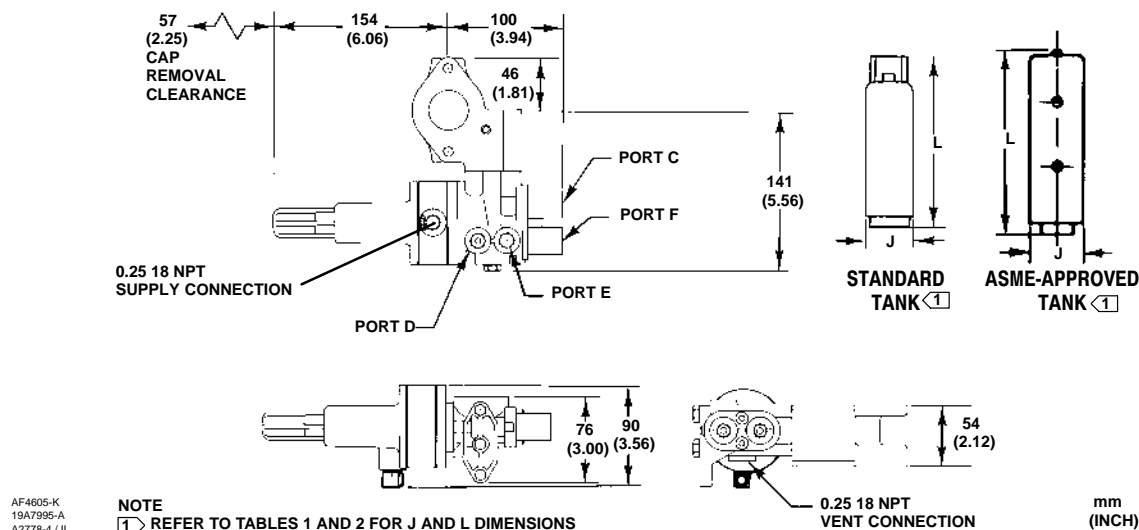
Dimensions of Trip Valve with Manifold (also see tables 2 and 3)
